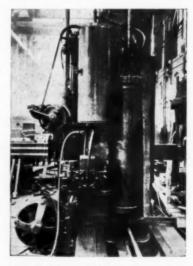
Air counterbalances the vertical movement of the head on this draw shaper machine. (Courtesy Compressed Air Institute).
